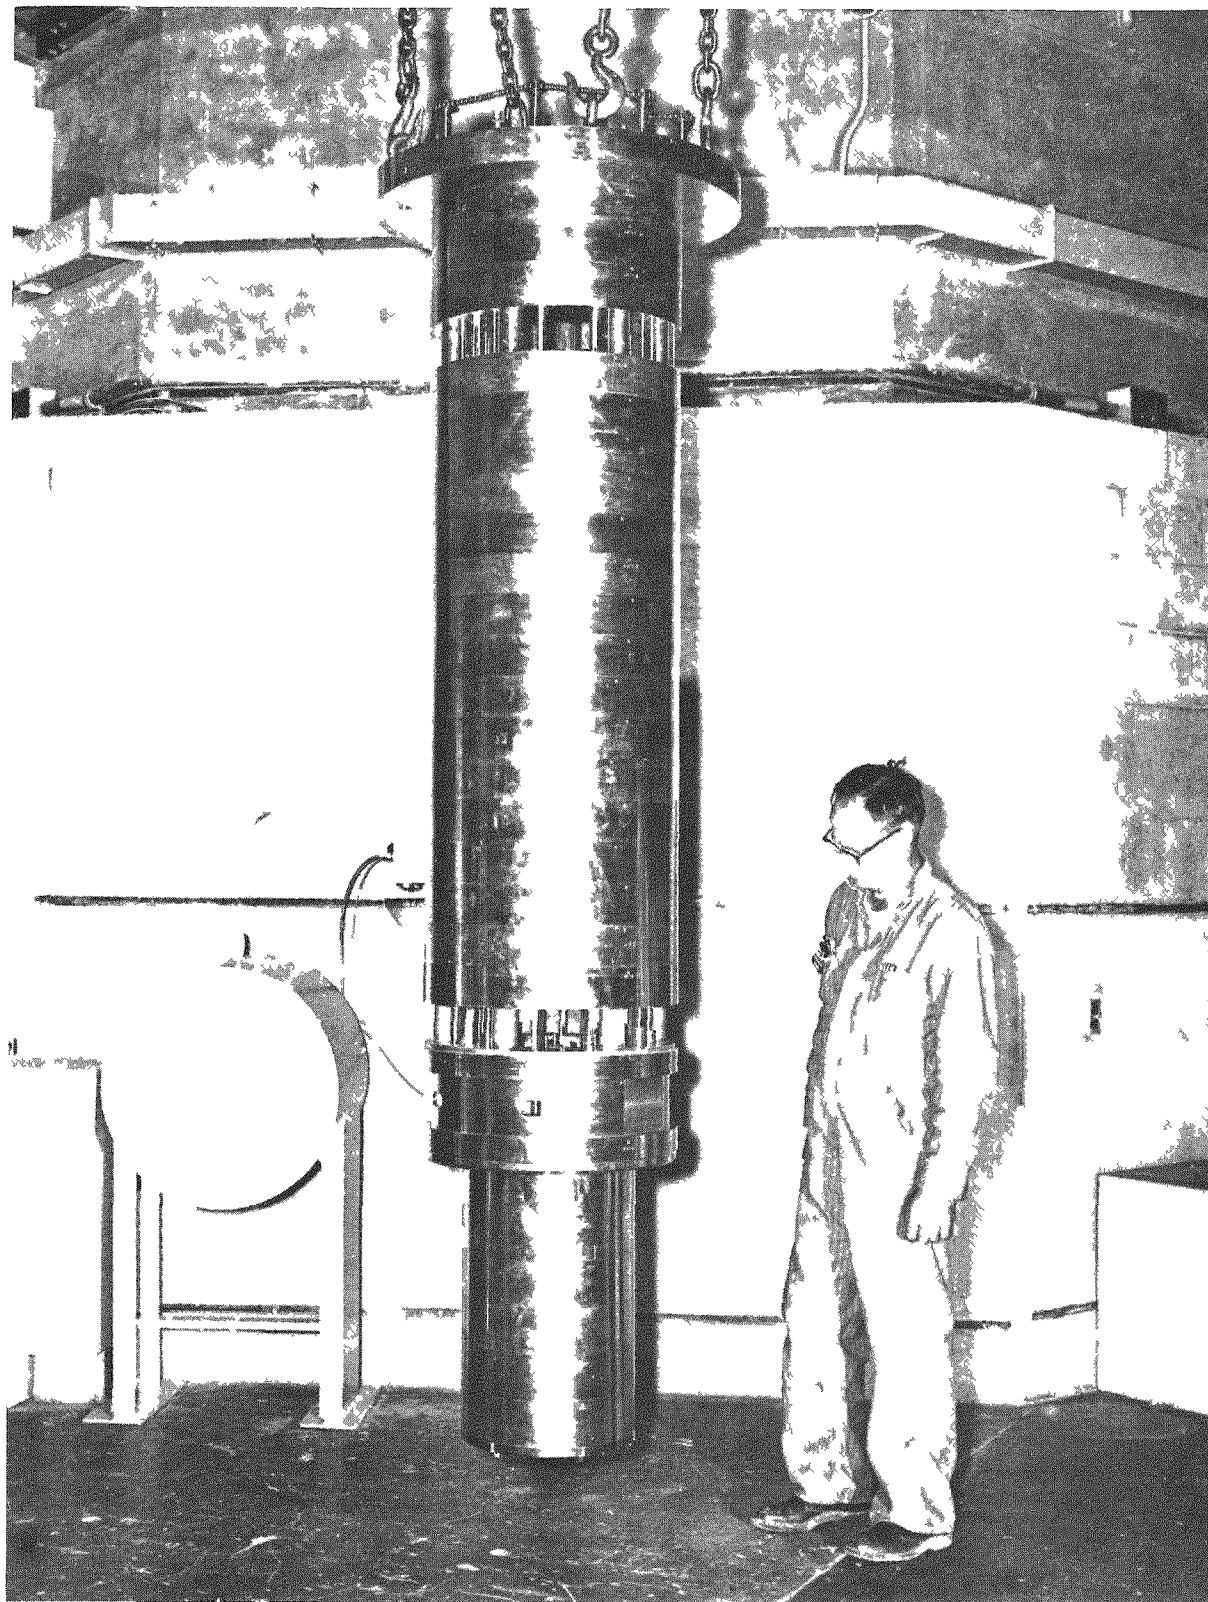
COMPLETED INNER TANK ASSEMBLY, REACTOR SHIELD BEHIND
